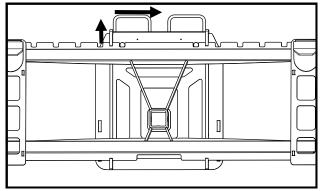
Slide Mounting Frame onto Fork Frame
